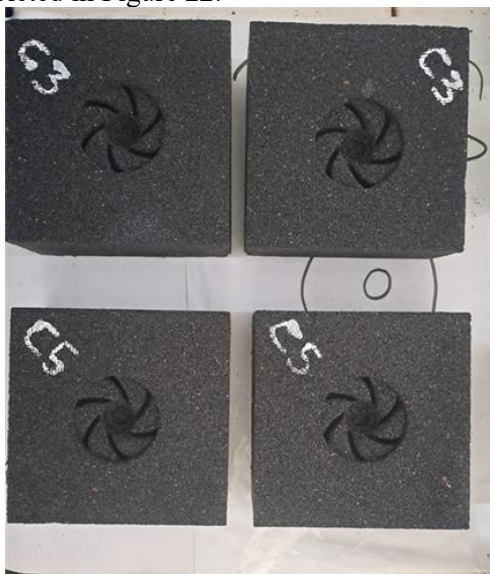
Chromite – chamotte sand mold before Shaw and Unicast processes.
